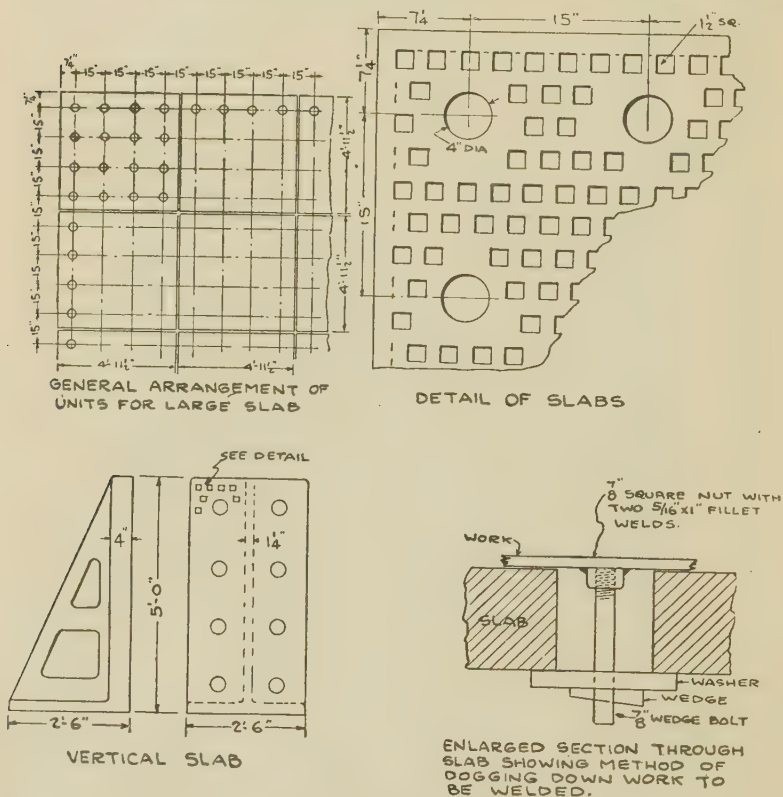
Arrangement and detail of welding slabs.
